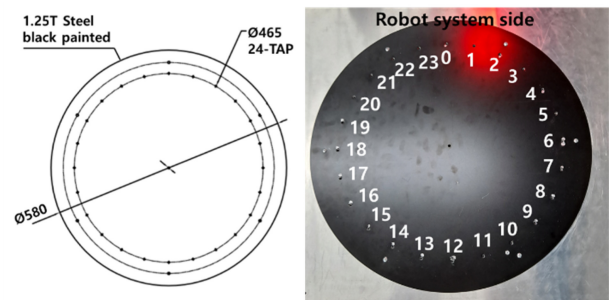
Steel plate with bolt hole positions (left : engineering drawing, right : manufactured goods)
